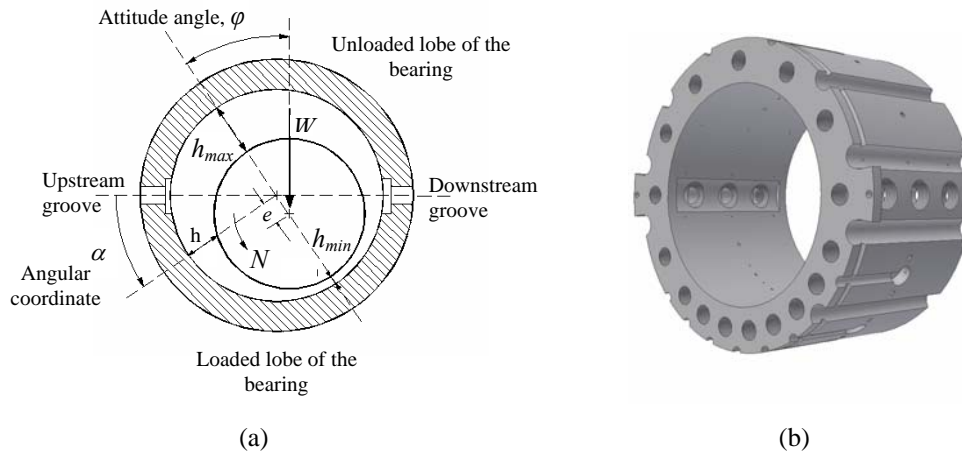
(a) Outline of the bearing under operation, (b) 3D drawing of the inner part of the bush
